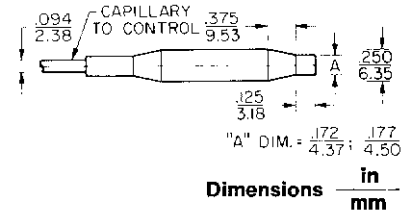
Drawing illustrating $\frac{1}{4}$ " section with reduced diameter end.
